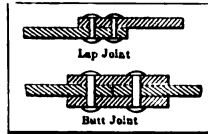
Showing a double rivetted lap joint and a double strapped butt joint—two common forms of sheet metal joints
